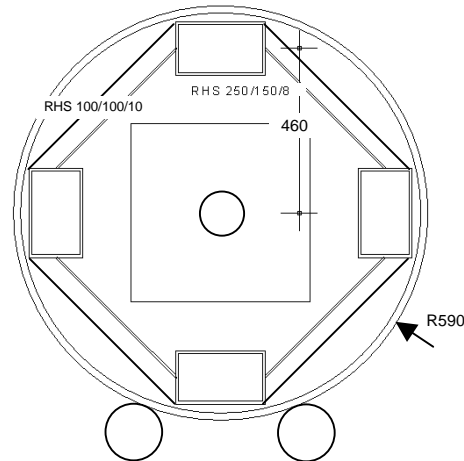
Cross-section of a rotating support structure for the quadrupoles. The trussed girder is about 10 m long, supported statically determinate on two rings with two rollers each. Dimensions are in mm.
